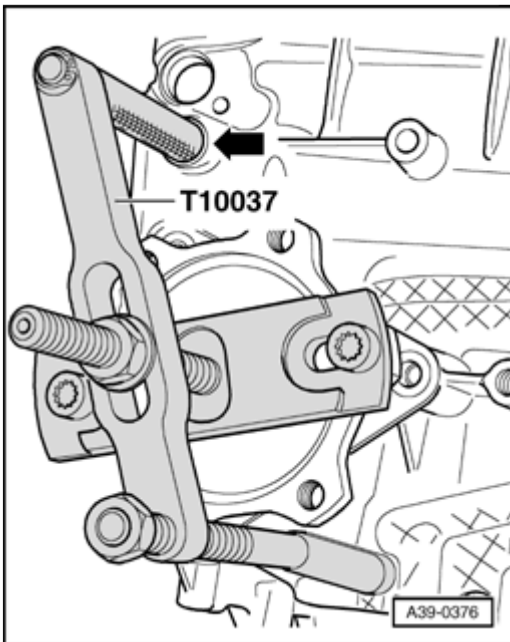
Screwing Puller T10037 Onto Differential Cover
